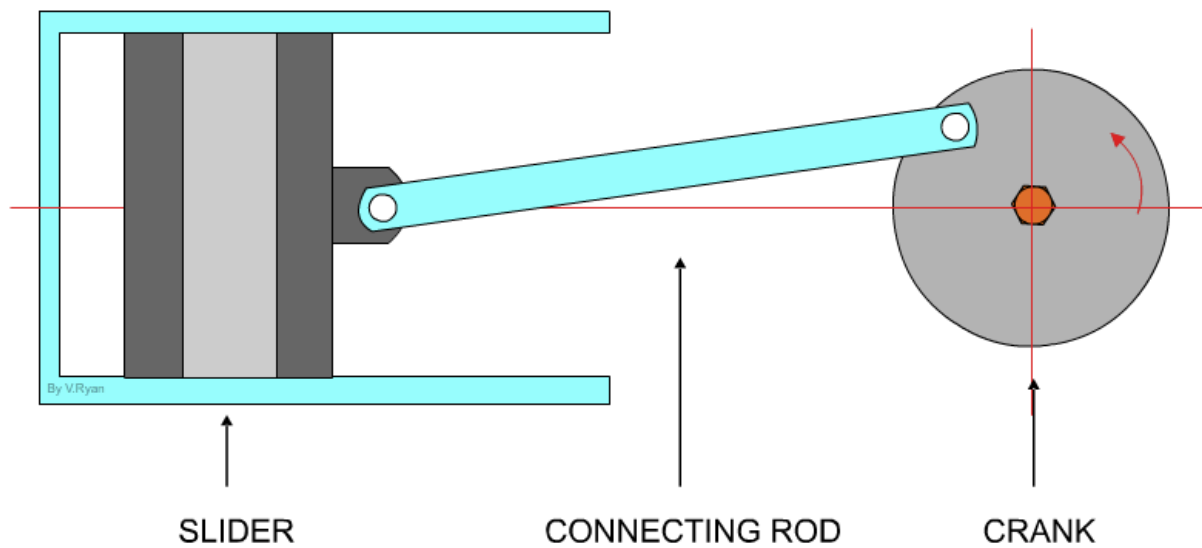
[2] *Inspiration behind design of the slider crank mechanism
